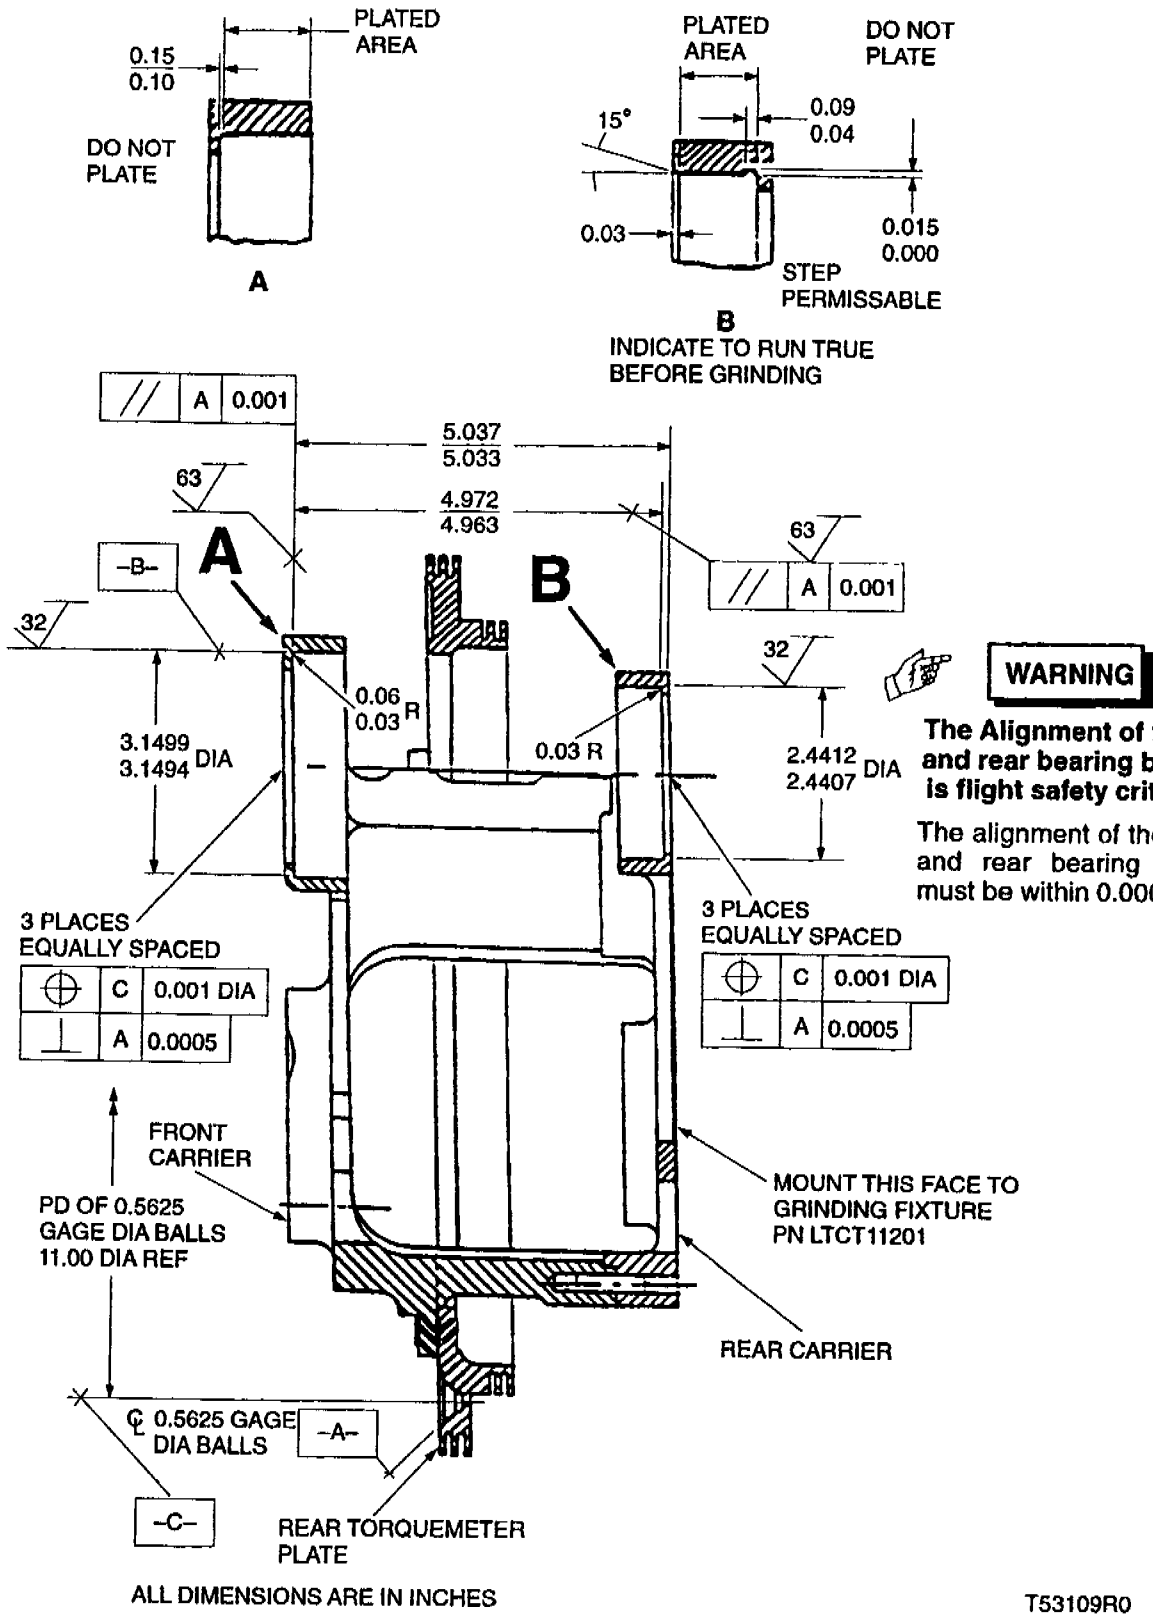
Carrier Assembly (1-030-340-04) - Plating Area (T53-L-13B, -703) (English).
